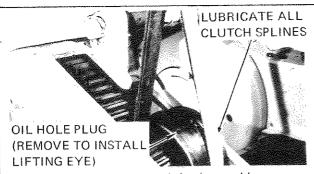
INSTALLATION OF BRAKE SHAFT ASSEMBLY (Sheet 2 of 2)
